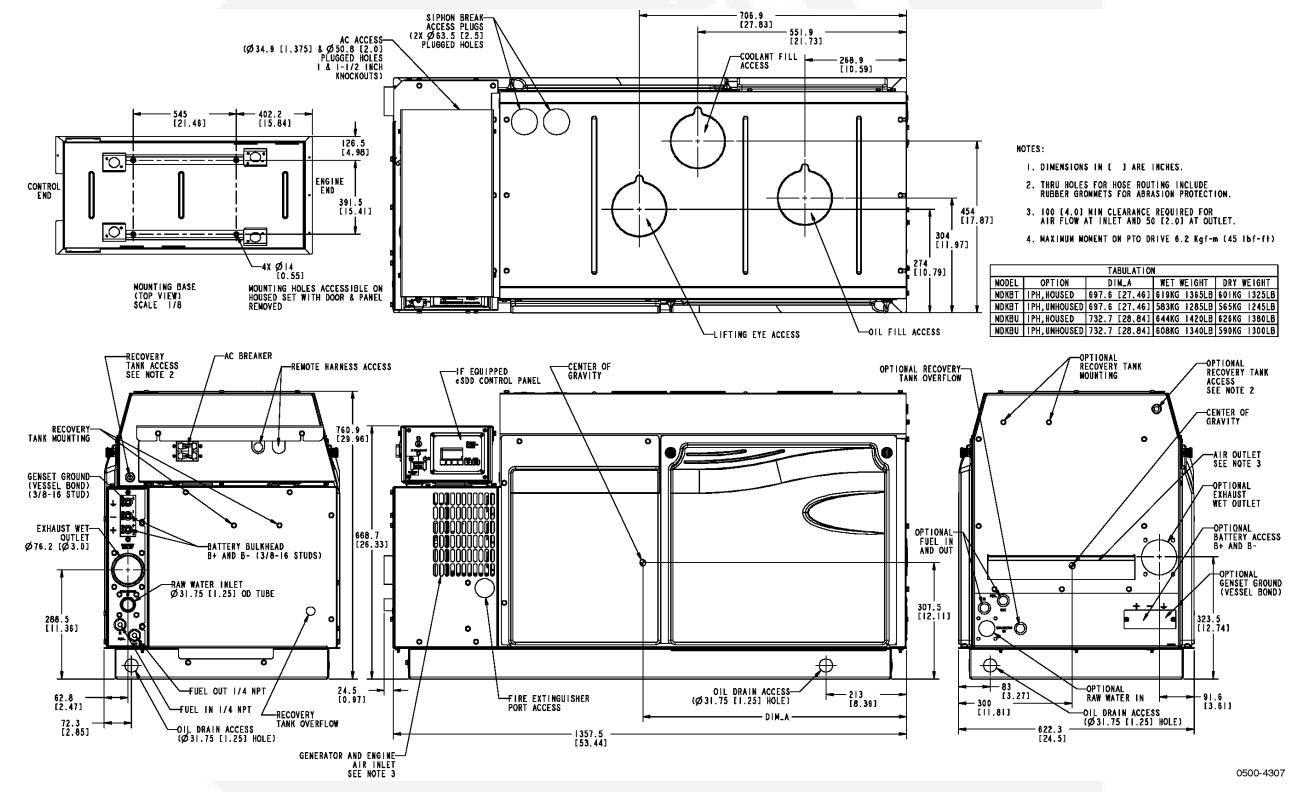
MDKBT AND MDKBU OUTLINE DRAWING (SHEET 1)
